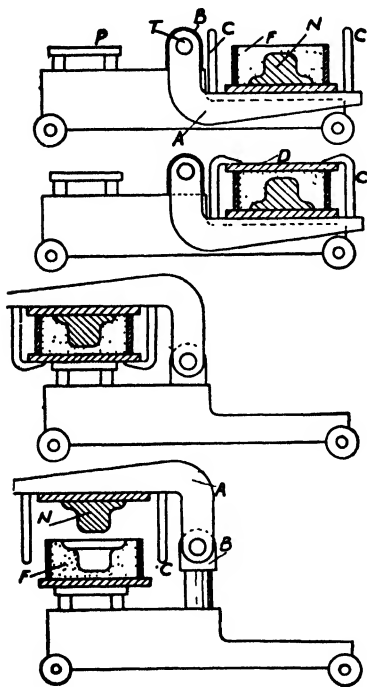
Principles of Portable Rollover Draw Machine Operation.
